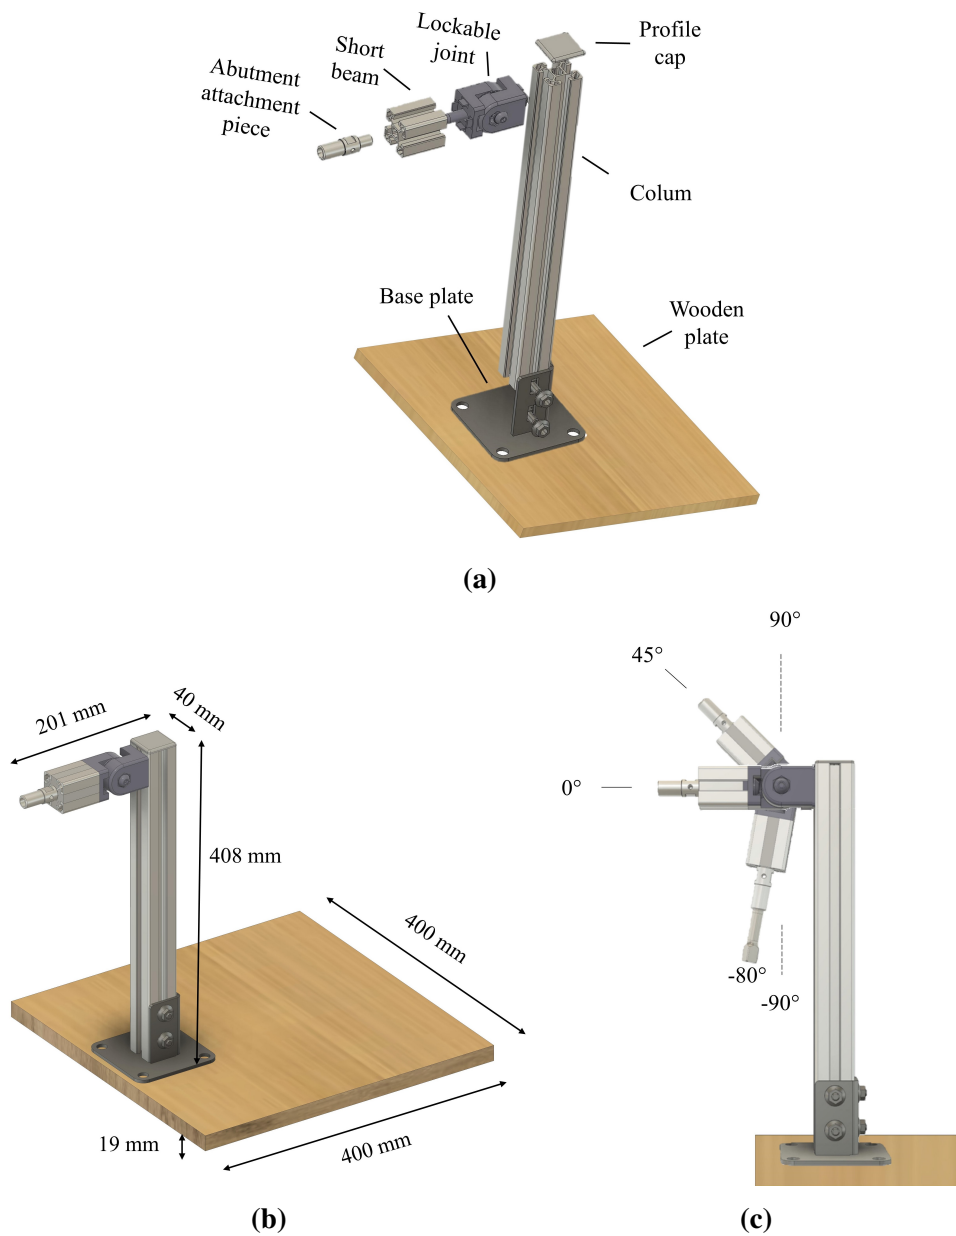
The final Test Rig design. (a) Exploded isometric view with components labeled. (b) Isometric view with dimensions. (c) The movement ranges of the Test Rig.
